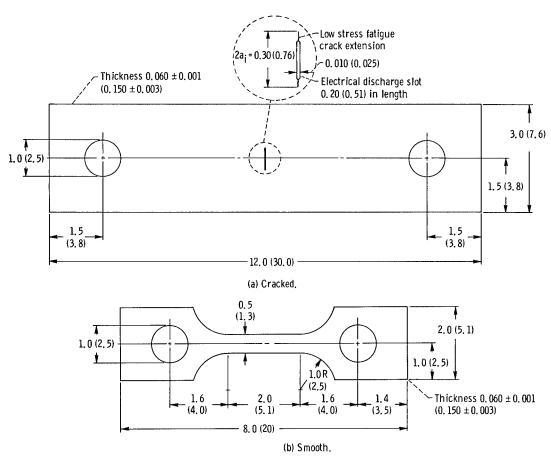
Smooth and cracked tensile specimens. (Dimensions are in inches (cm).)
